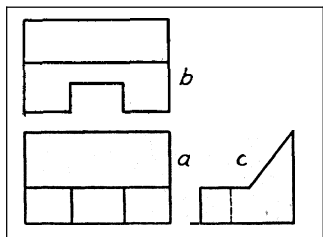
FRONT, TOP AND RIGHT SIDE VIEWS OF BLOCK
